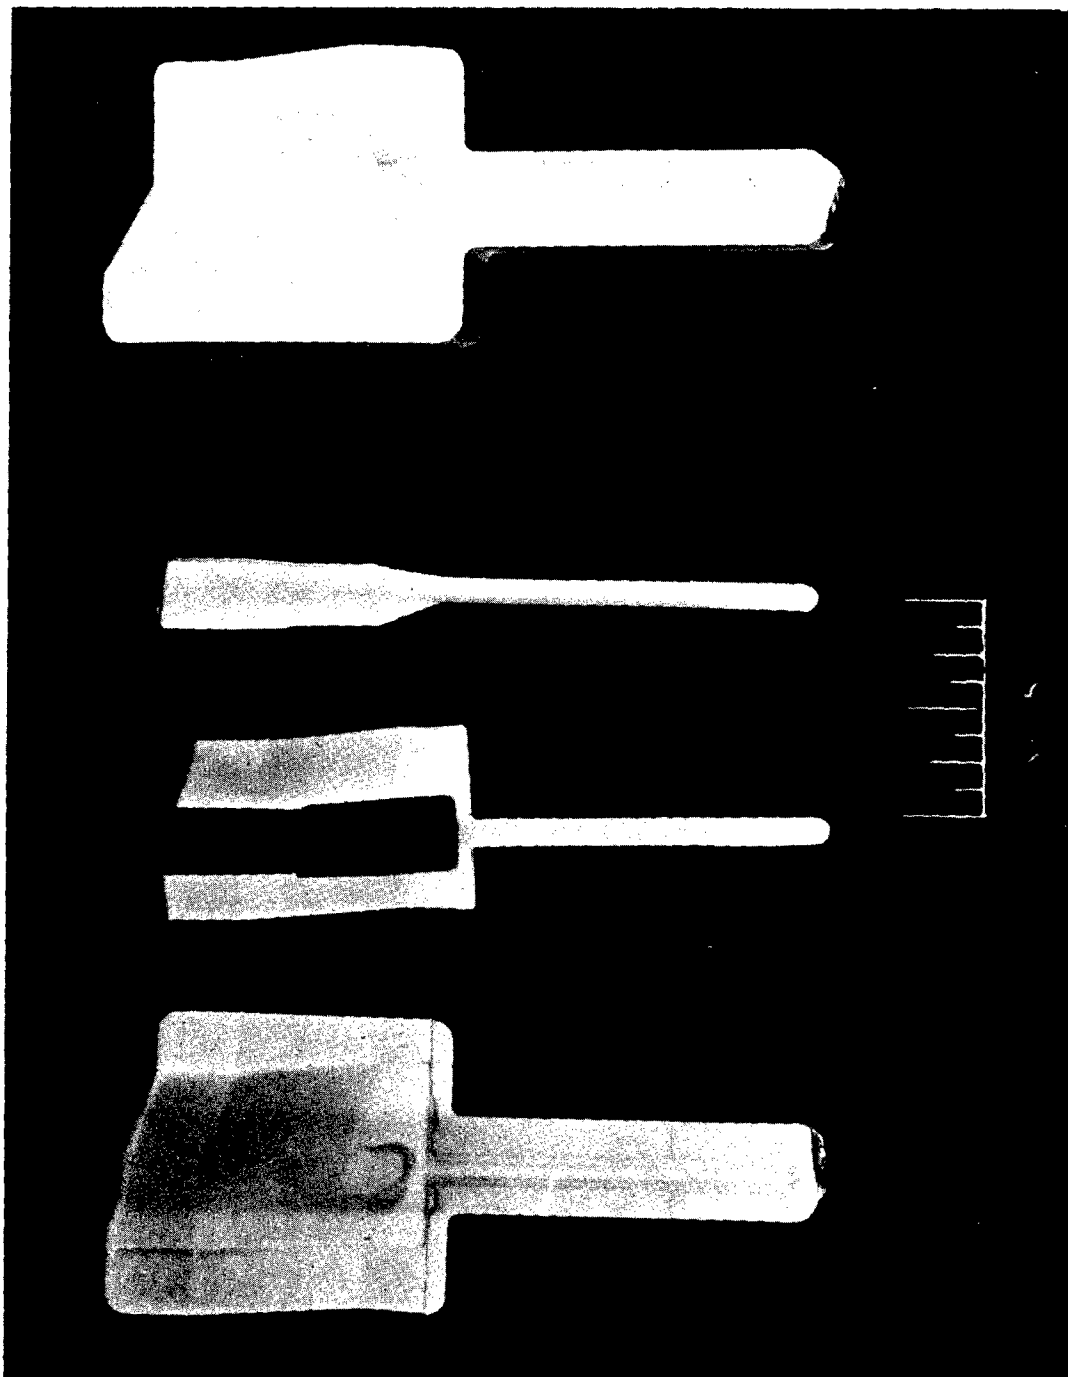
(Left and Right) - Ceramic Setter Block Halves.
